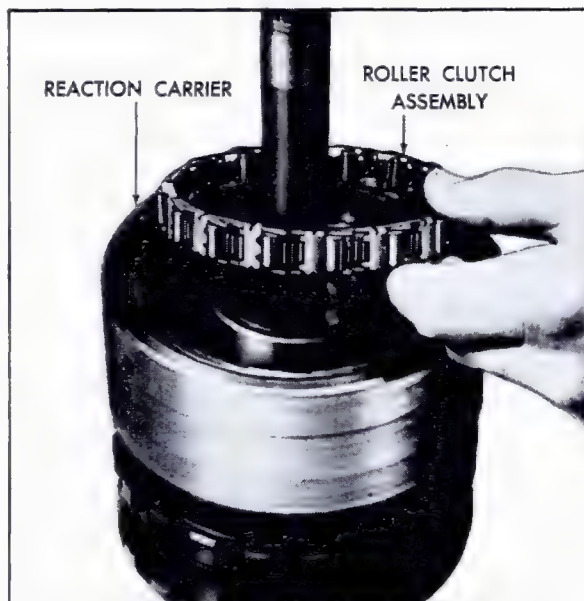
Installing Roller Clutch Assembly in Reaction Carrier
